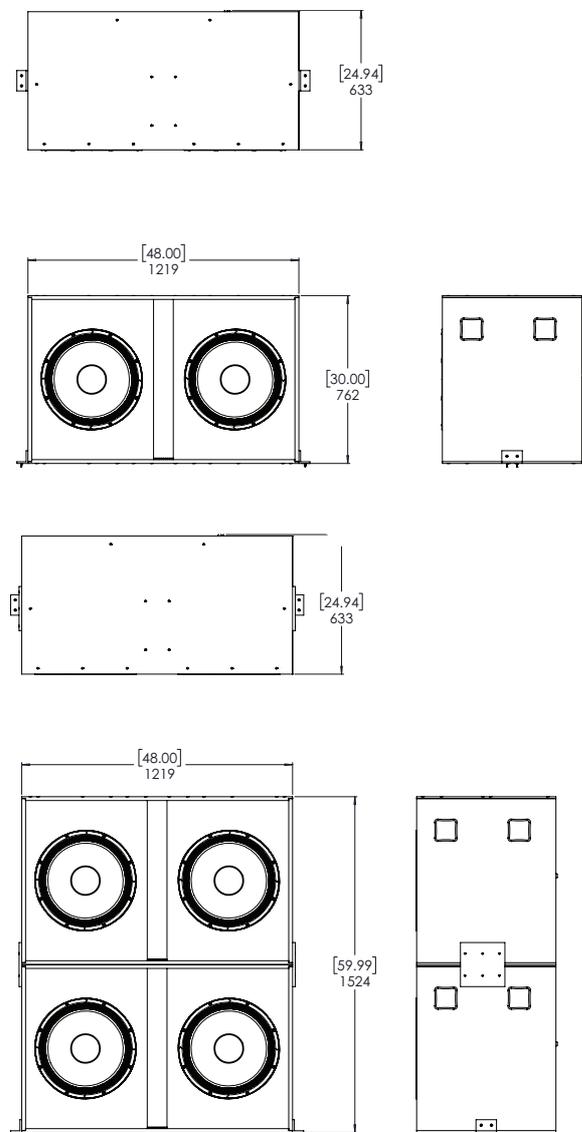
CS218XL Dimensions in [Inches] and Millimeters
